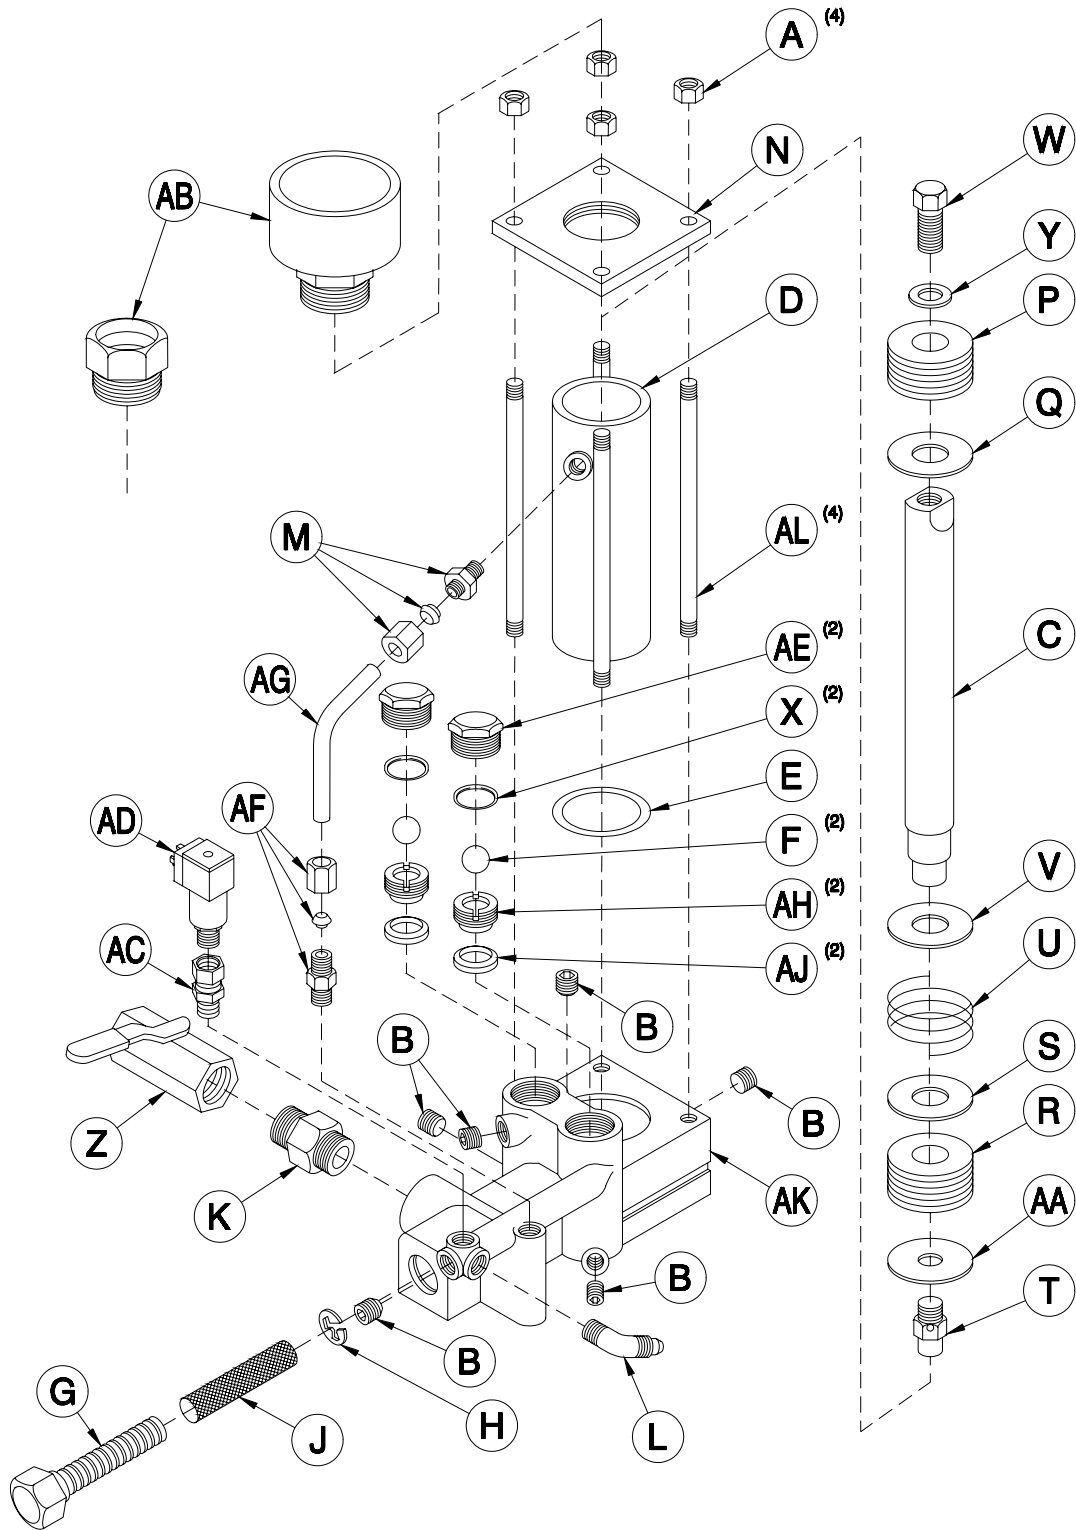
Proportioning Pump (Part No. 25400/25450-40), Exploded View
